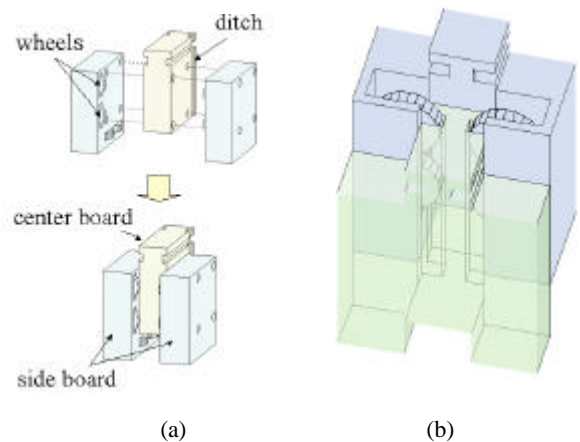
Assembly of the proposed cellular robot (a) and connecting face driven by wheels (b)
